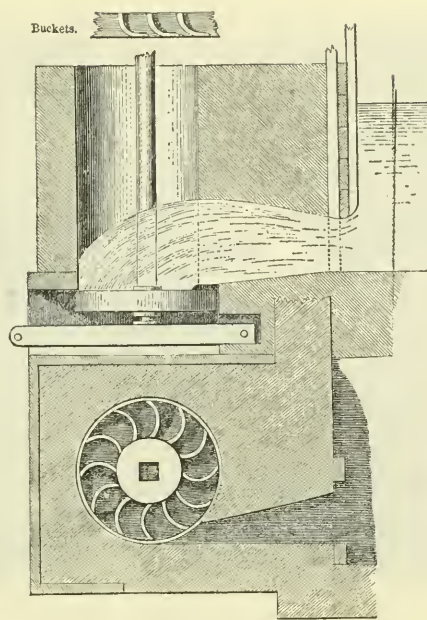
TUB WHEEL (ROUE À CUVE).
